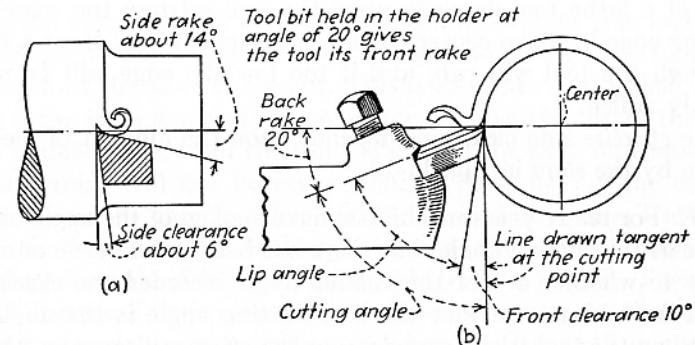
(a) Side rake and side clearance; (b) back rake and front clearance. The line drawn tangent at the cutting point shows the direction of the force against the tool. Set "on center," this tool has 10-deg. front clearance. If it were set a little above center, it would have less effective front clearance, less cutting angle, and more rake.
